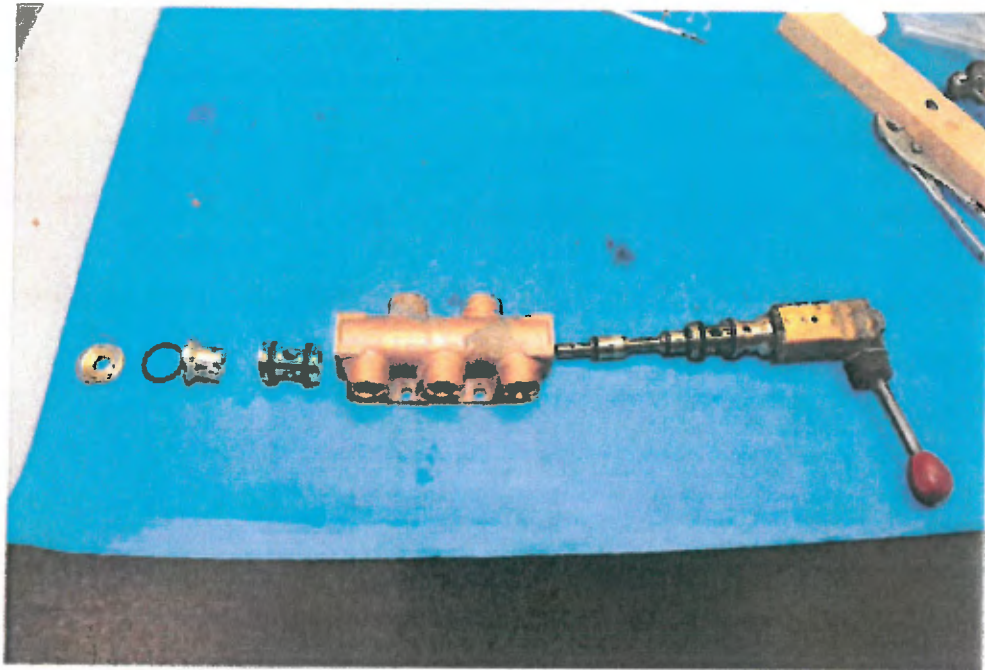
Disassembled Valve Removed from Trailer Unit 6775
